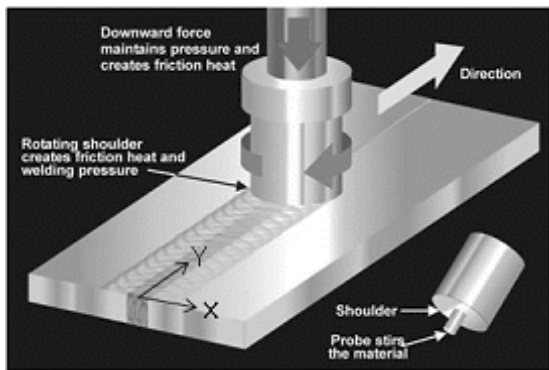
Schematic diagram of friction stir welding¹⁵⁾
